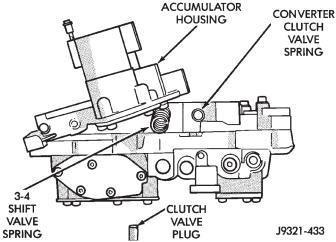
3-4 Shift And Converter Clutch Valve Springs And Plug
